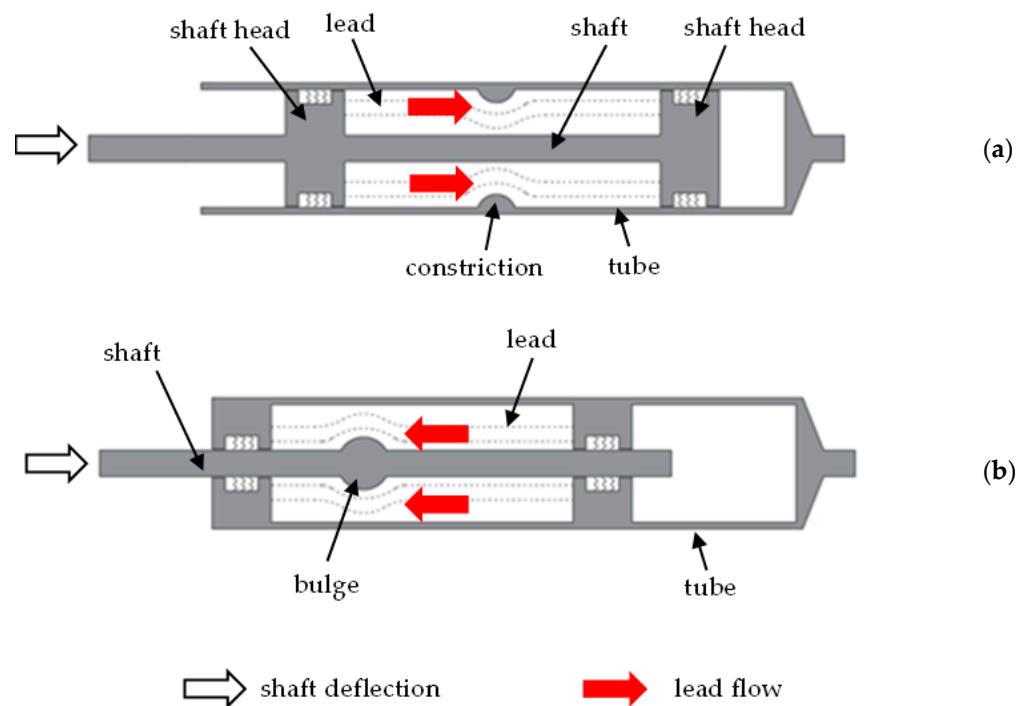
Longitudinal section of lead extrusion dampers: constricted tube type (a); bulged shaft type (b). Adapted from [24].
